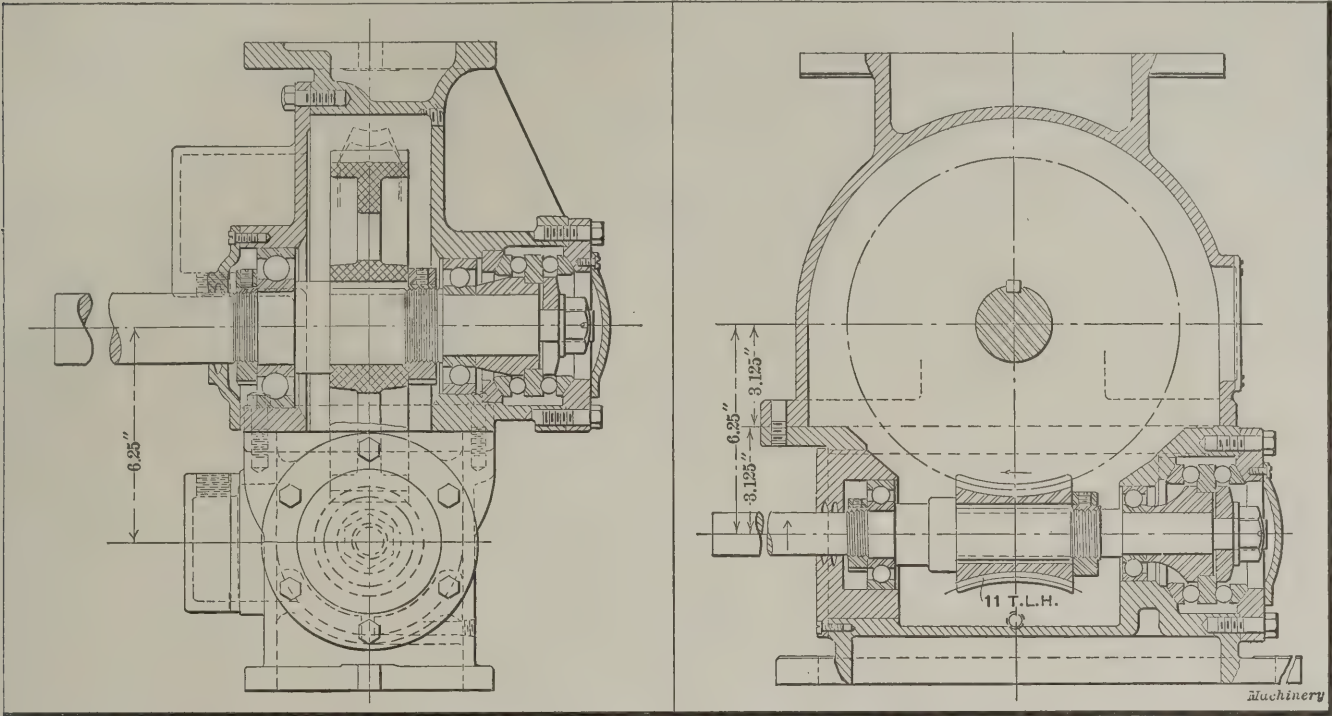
Section through Gear Case used for Testing Worm-gear Drives
